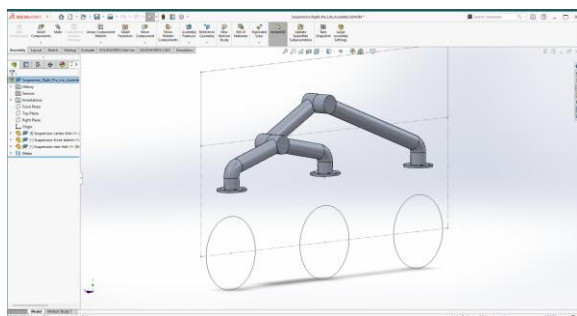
Pre-Liminary Assembly of the suspension system for the right side of the rover.
